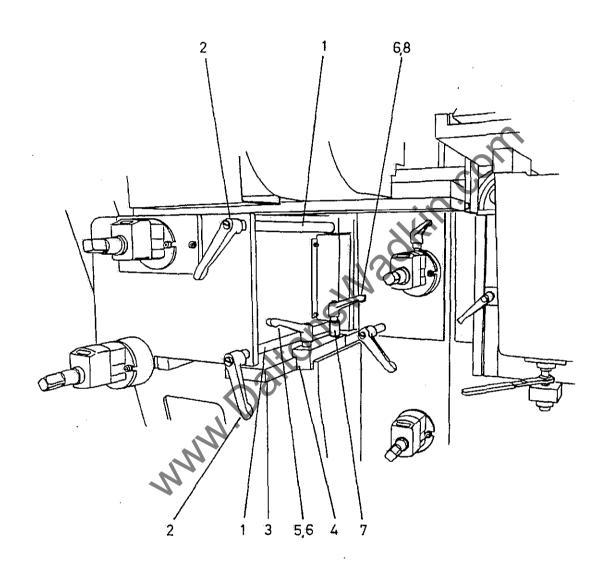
NEAR SIDE HEAD SPINDLE AND CARRIAGE LOCKS
